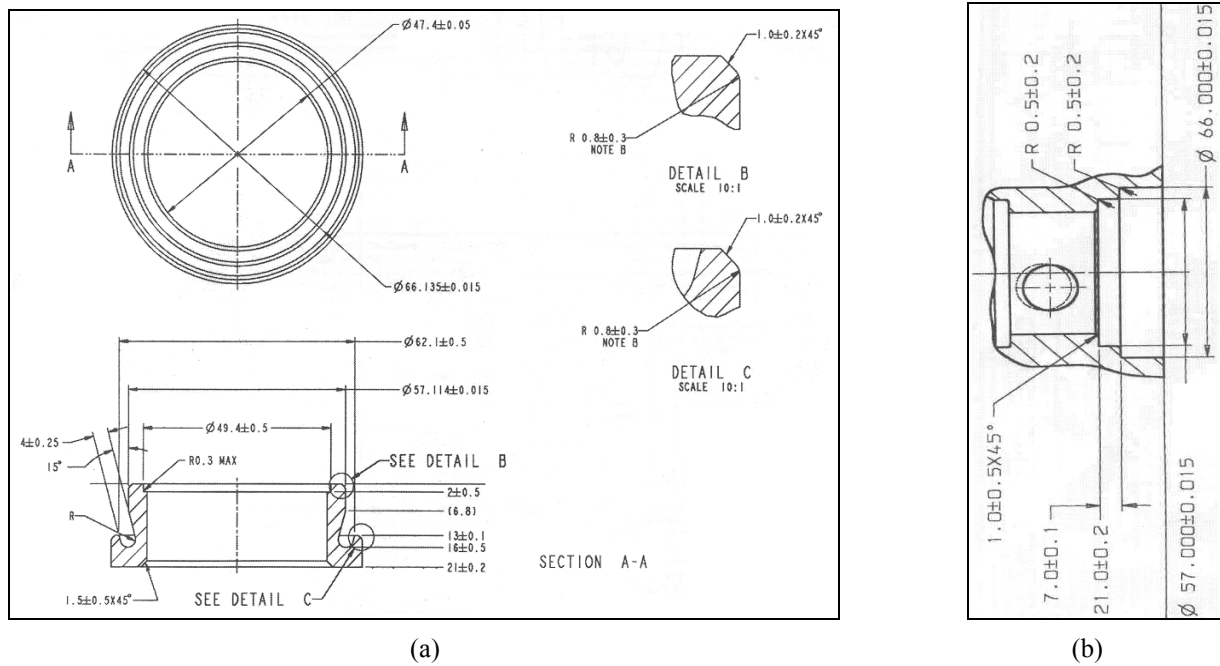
Internal combustion stainless steel gas engine insert geometry and dimensions. Insert (a) and prechamber engine cylinder (b).
